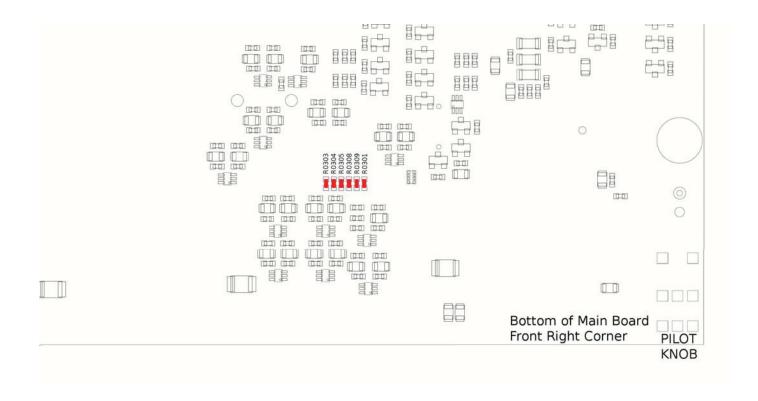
GMA 240 Internal Configuration Jumper Layout Drawing
